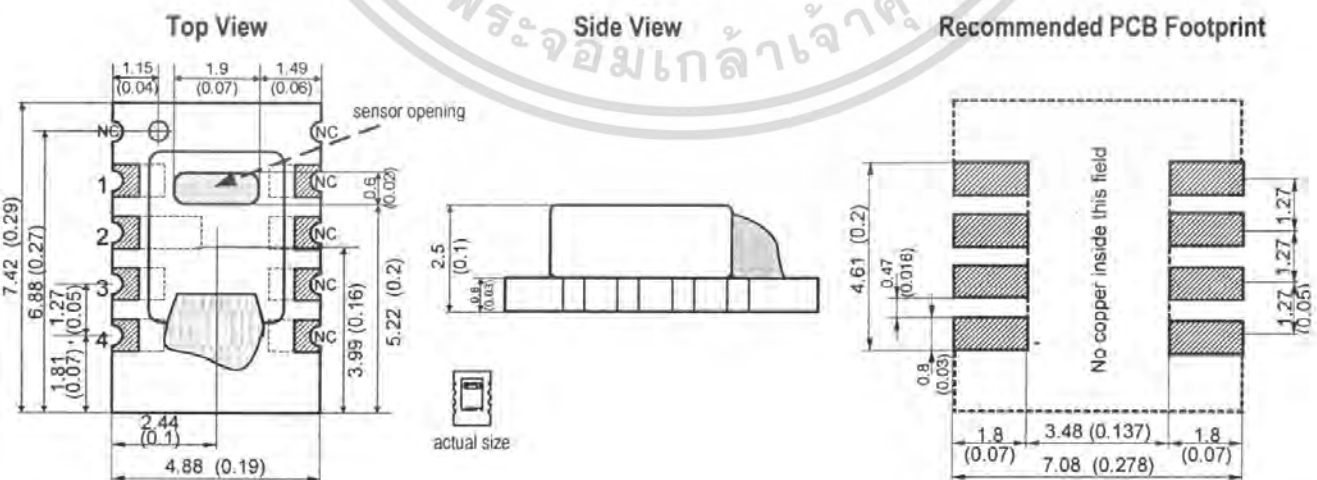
SHT1x drawing and footprint dimensions in mm (inch)
